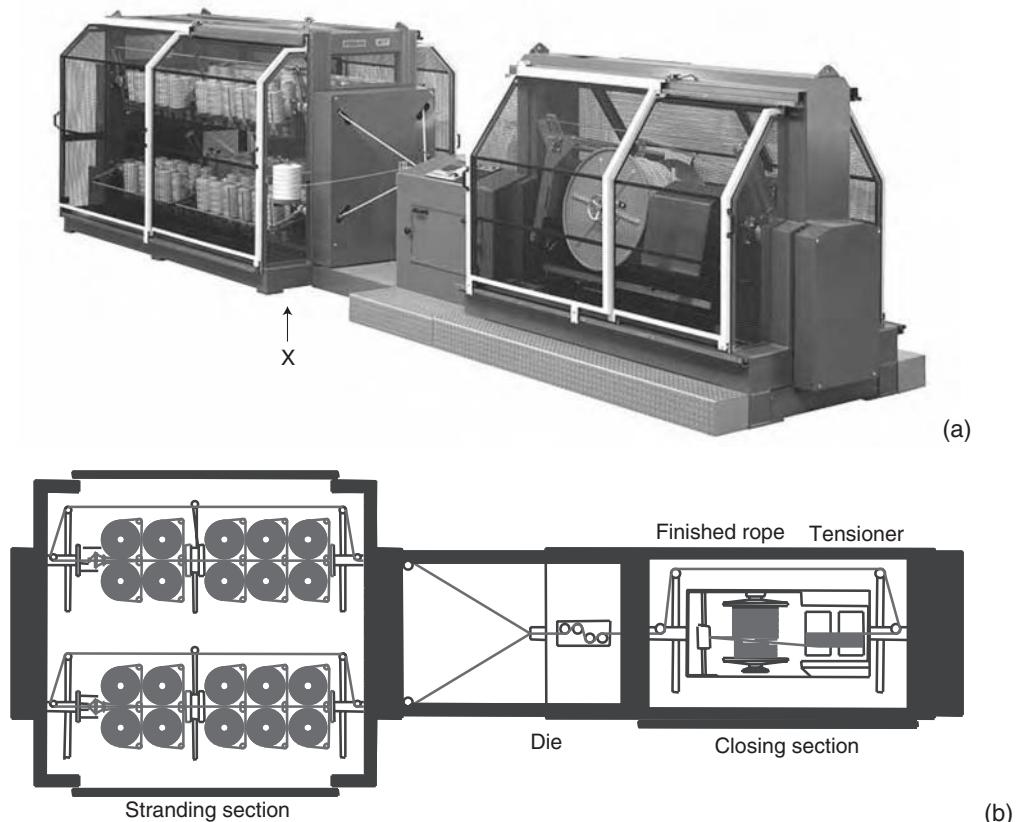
(a) Integral rope-making machine. (b) Schematic of machine. Reproduced by courtesy of Roblon.
